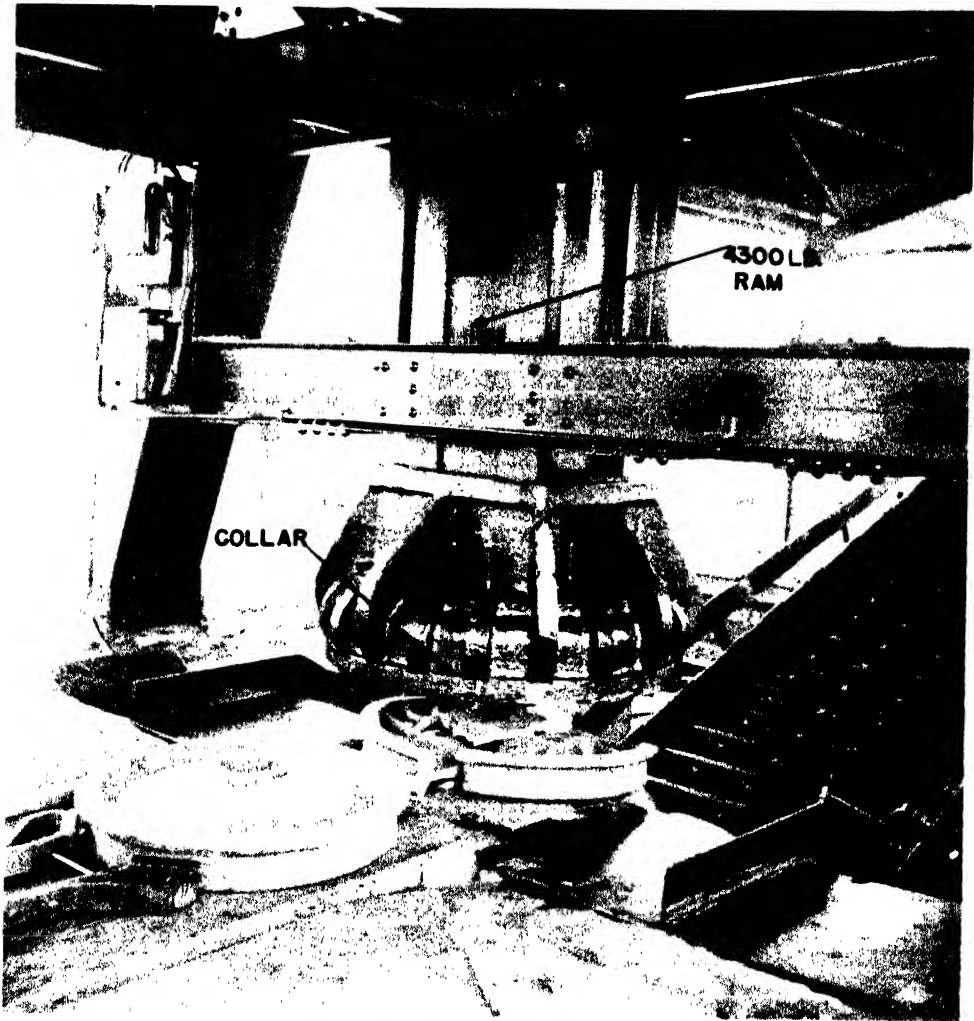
WHEEL CRUSHING MACHINE. (Courtesy, American Car and Foundry Co.)
